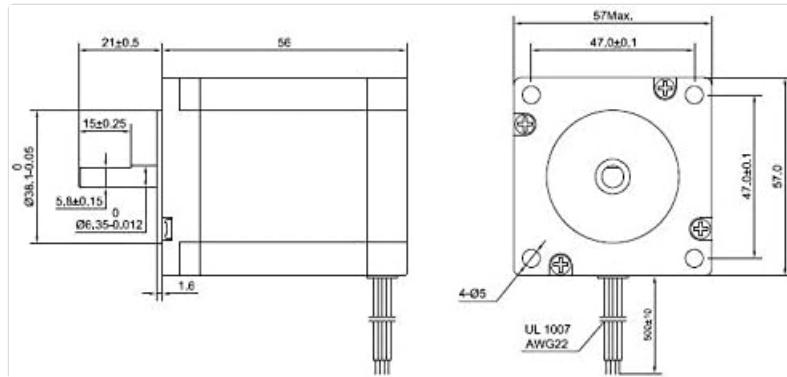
Dimensional drawing of the Nema 23 Stepper Motor (Model 23HS22-2804S) with key measurements in millimeters.
